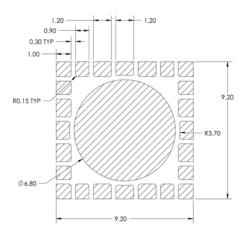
Recommended solder mask opening (hatched area) for anode, cathode, and thermal pad.
